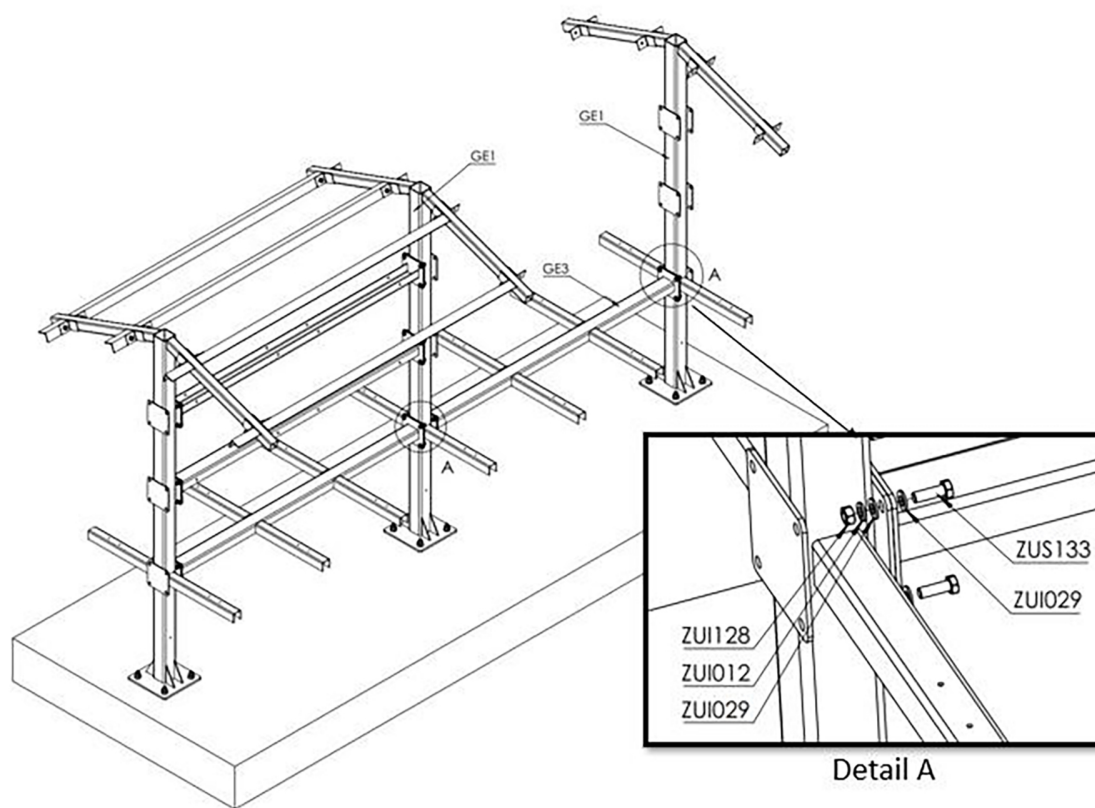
Assembly — Inverter rack — GE3-2, GE1 (detailed view)
